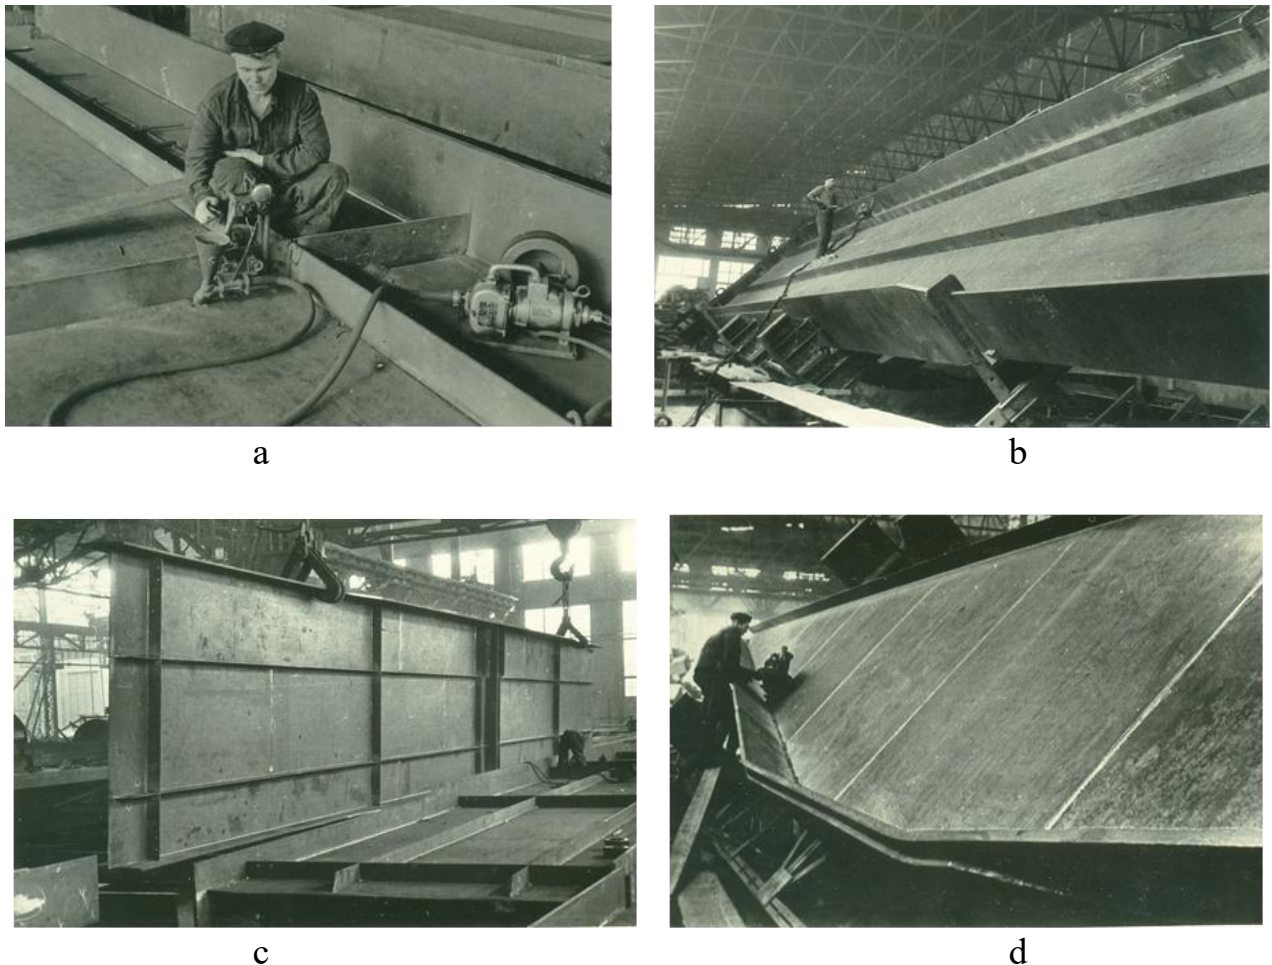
Large-block production of metal structures for the Evgeny Paton Bridge at the plant in Dnipropetrovsk (Lobanov, 2014), where: (a) welding-on of stiffener using semi-automatic machine PSh-5 with holder DSh-27; (b) process of welding of longitudinal butts using tractor TS-17M in the tilter; (c) welding-on of edges of stiffeners; (d) Welding of girth welds of haunch in the rig (Lobanov, 2014).
